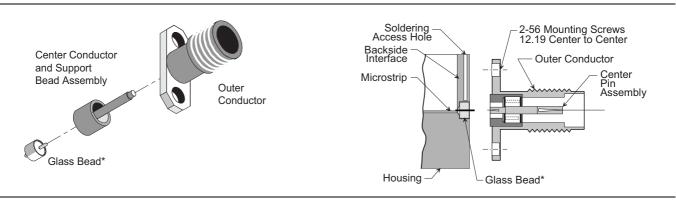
V103F-R Assembly (*Glass Bead not supplied)
